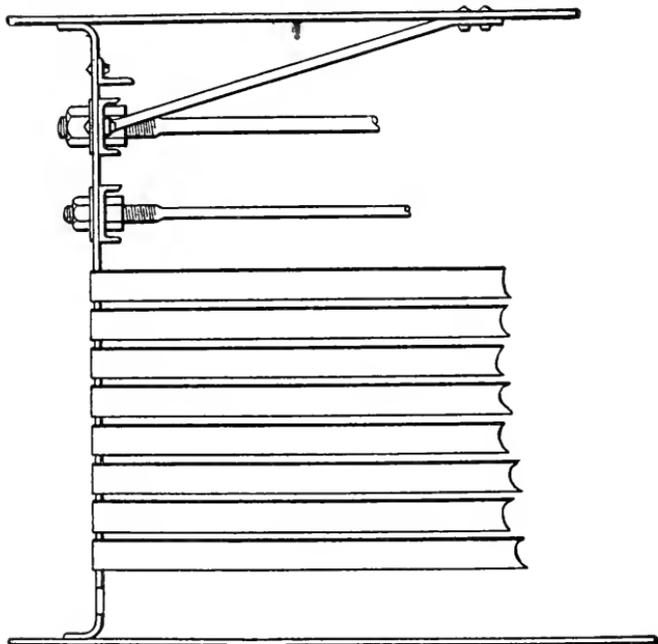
SIDE VIEW OF A BOILER HEAD WITH THROUGH BRACES.
